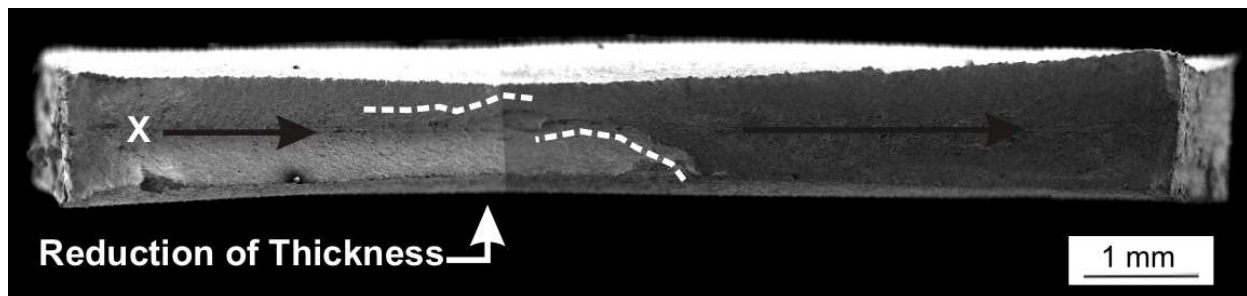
Top view of the fracture surface of a welded specimen that had a BM failure location.
